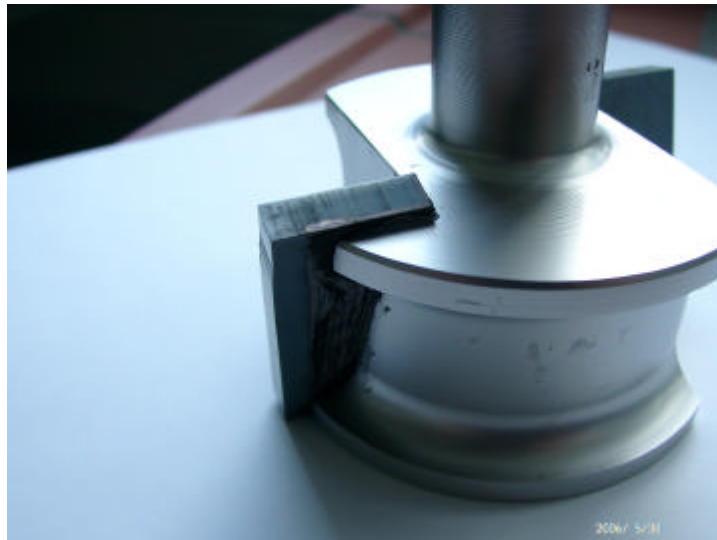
Milling cutter with bigger ceramic cutting inserts
